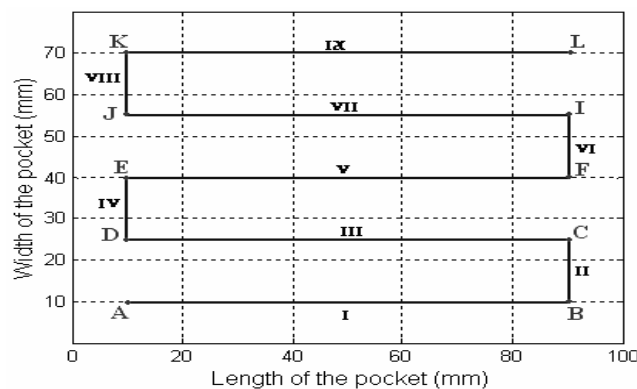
The tool path during the zigzag hollowing out of a pocket.
